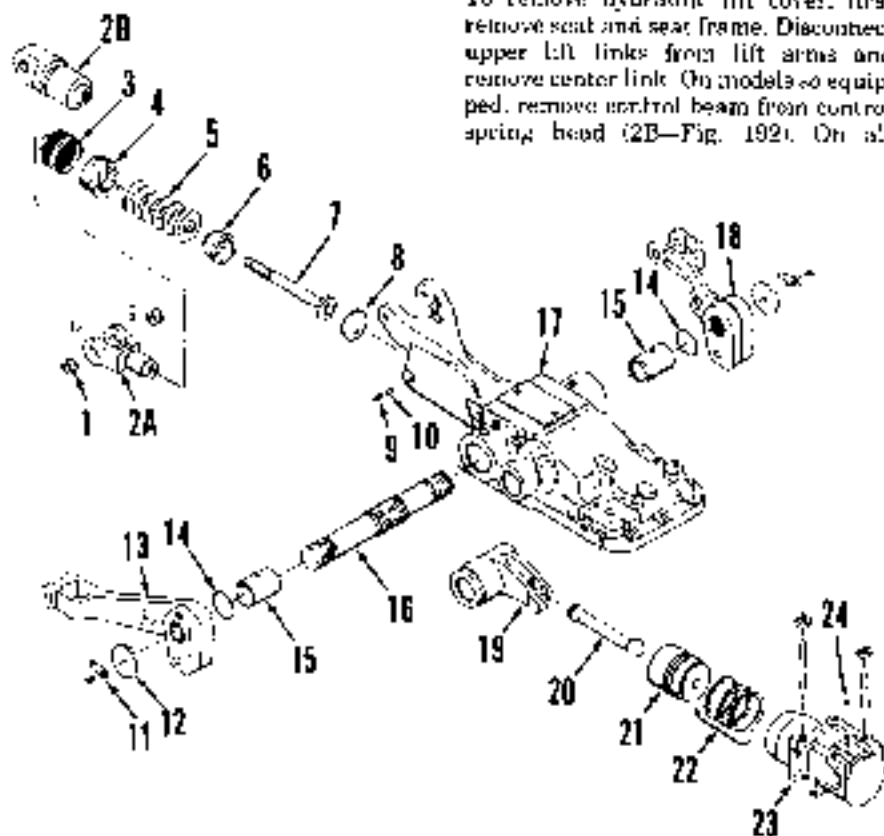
Exploded view of hydraulic lift cover, master control spring, rockshaft, lift cylinder and associated parts.
